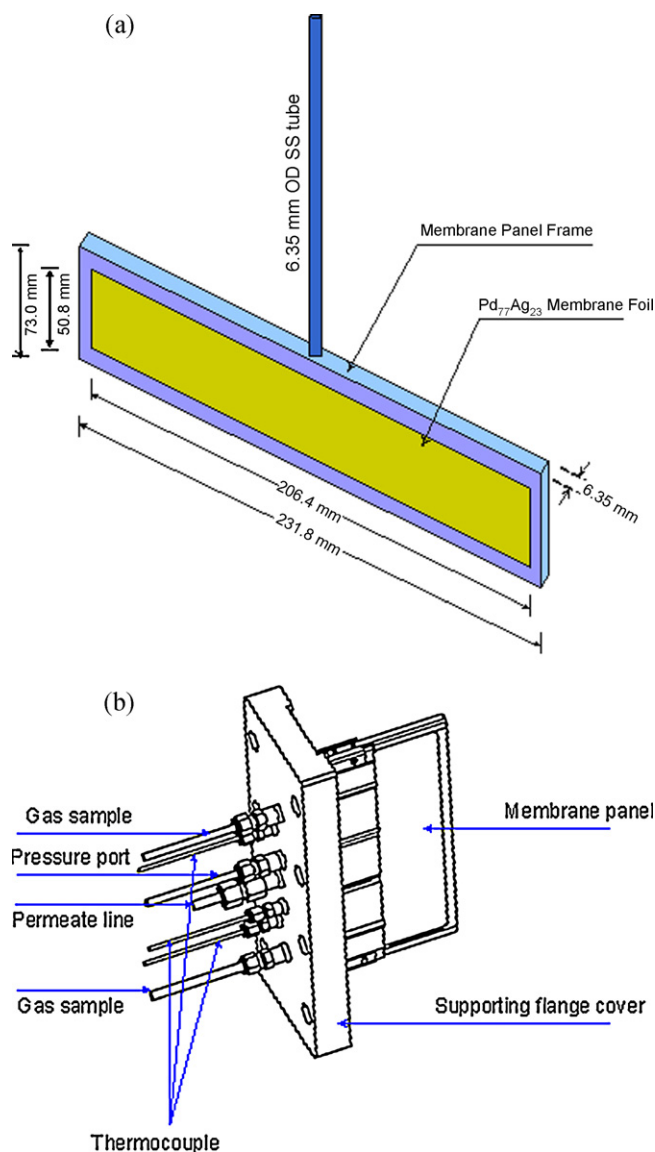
(a) Dimensions of membrane panel. (b) Ports arranged on each side-opening cover where membrane panels are installed.
